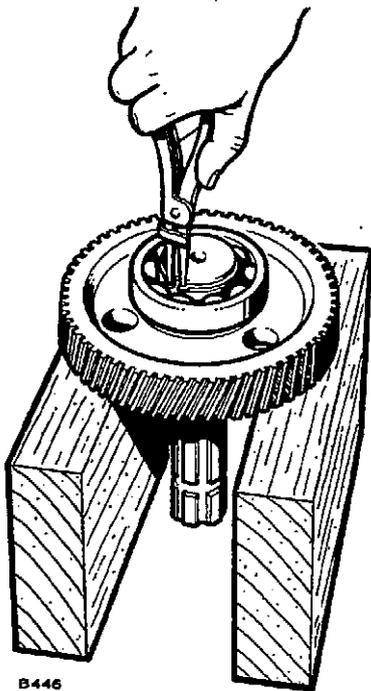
INSTALLING SNAP RING BEHIND DRIVE GEAR BEARING
